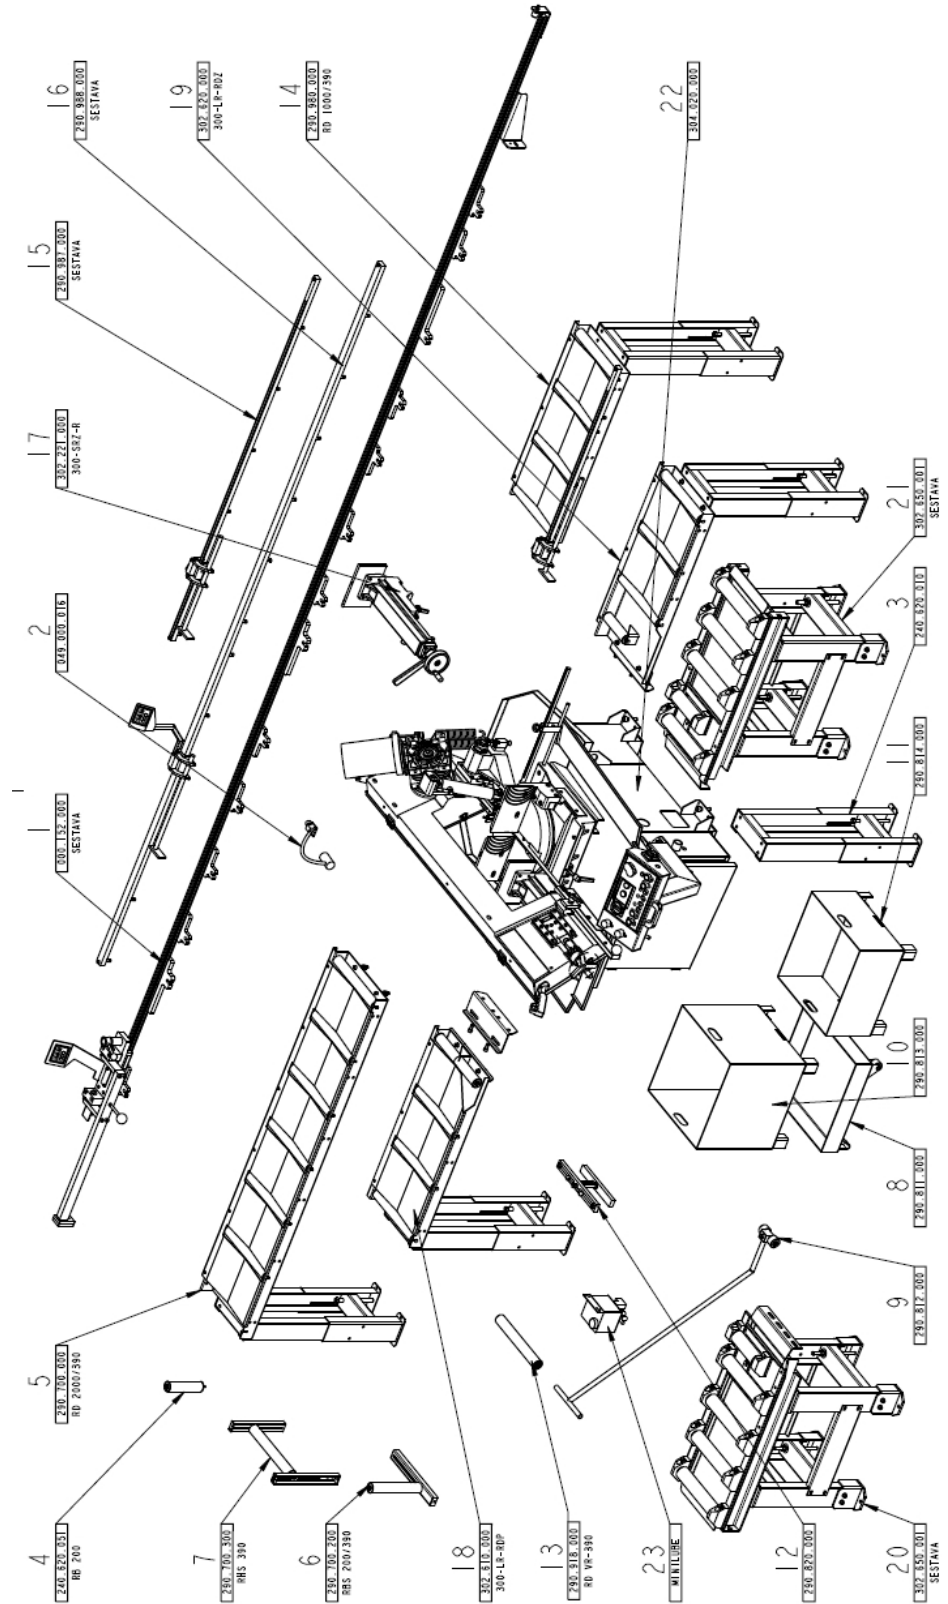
Spare parts drawing / Ersatzteilzeichnung 1
